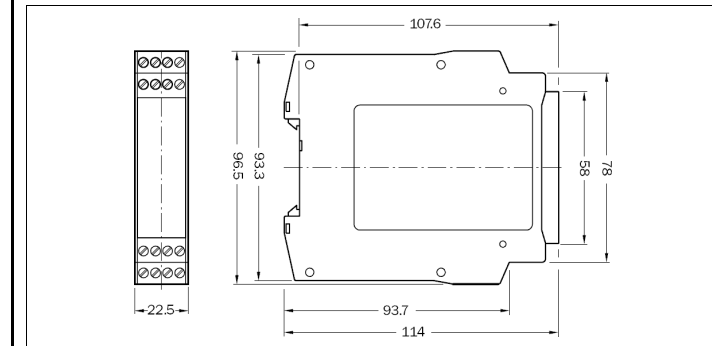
Dimensional drawing UE11-4DX with removable terminals (mm)
